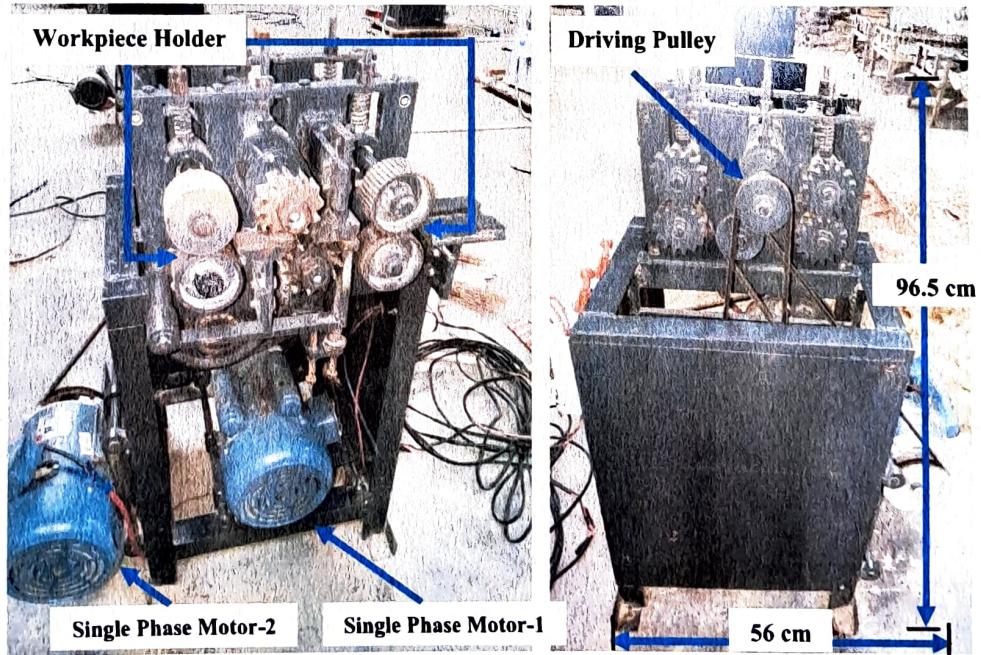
Prototype of Redesigned Bamboo Slicing Machine
